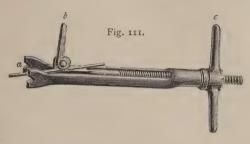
, 112 show other useful forms of straining-screws. The end (a) of that shown in Fig. 111 being placed against the post, the wire is passed through the opening and fixed to the vice (b) by a screw-bolt and nut, and then tightened up
